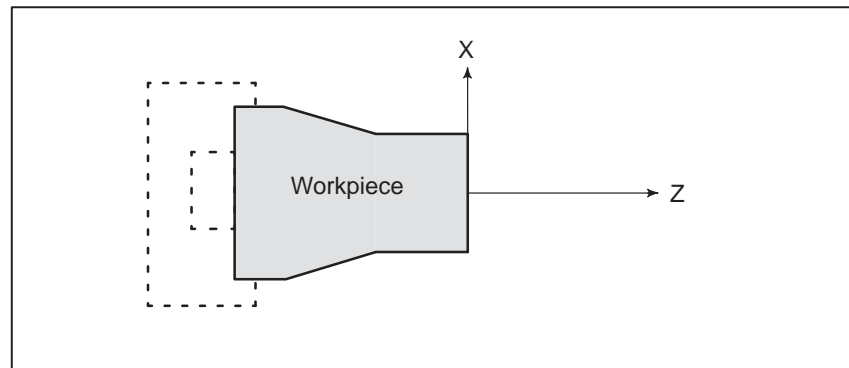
(e) Coordinates and dimensions on part drawing
